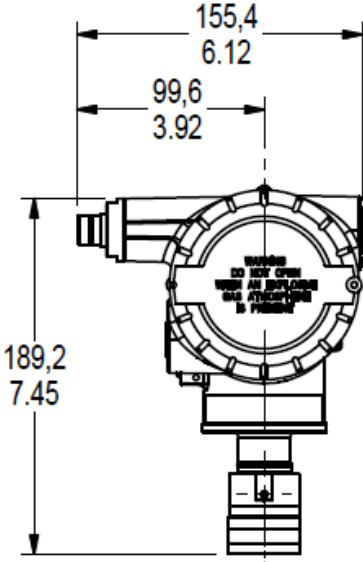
In-Line, typical mounting dimensions for STAW74L (remote adaptor shown)
